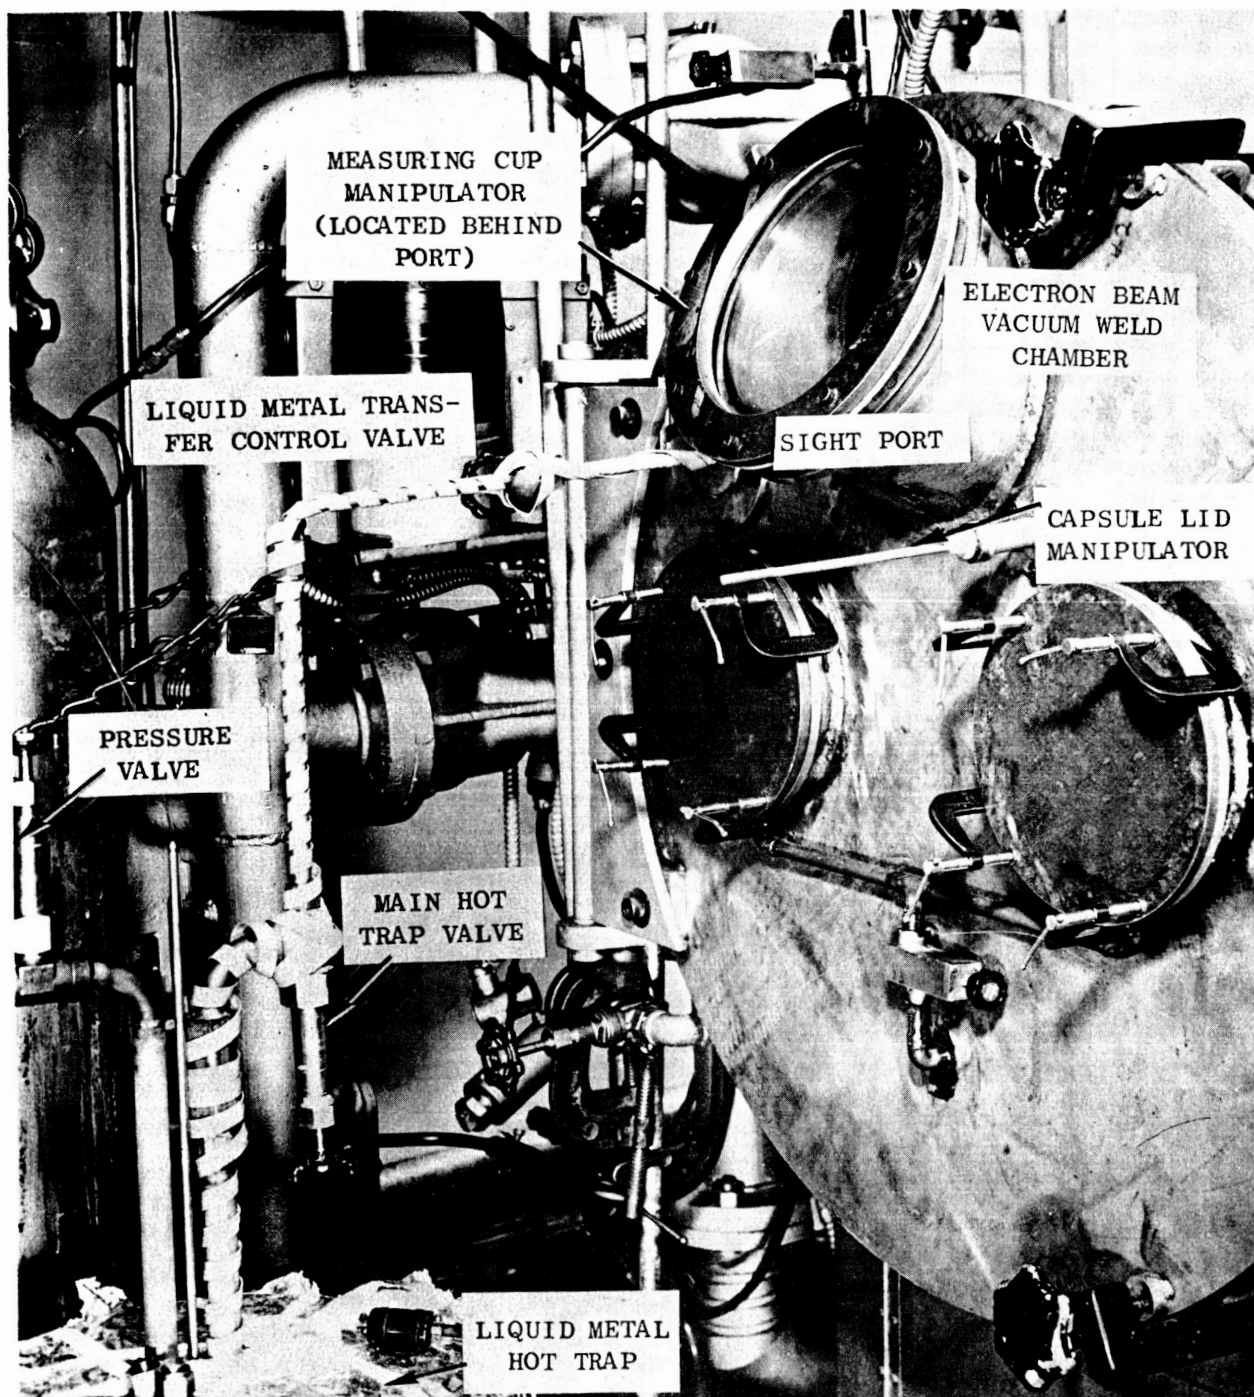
External View of the Apparatus Used in Loading the Refluxing Capsules with Potassium in a Vacuum. Following Loading the Capsules were Sealed by Electron Beam Welding in this Chamber.
